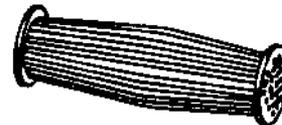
(d) is the coil tube bundle which is used for very high pressures. It does away with gasketed joints in the high pressure circuit.
